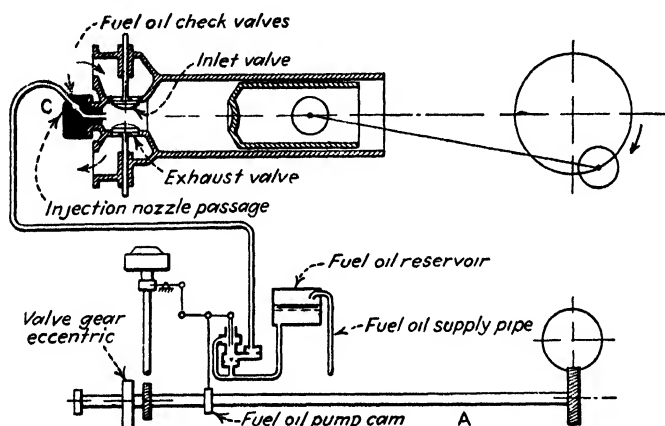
Schematic arrangement of a compressorless, or, mechanical-injection Diesel
